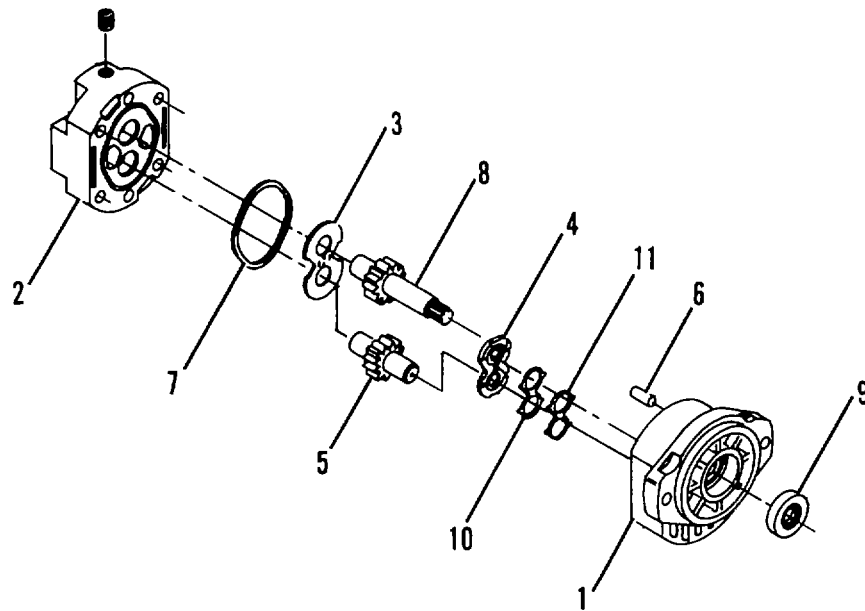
Hydraulic Pump Assembly (Sheet 2 of 2).
